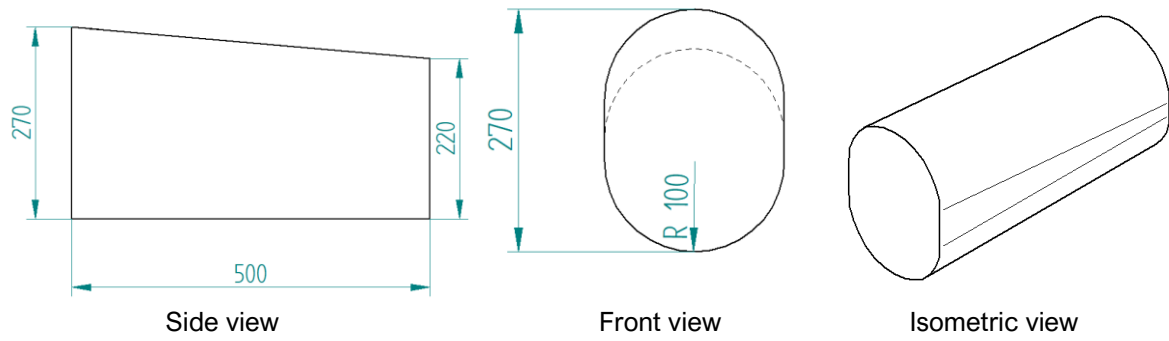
Dimensions of the dowel (all dimensions in mm)
